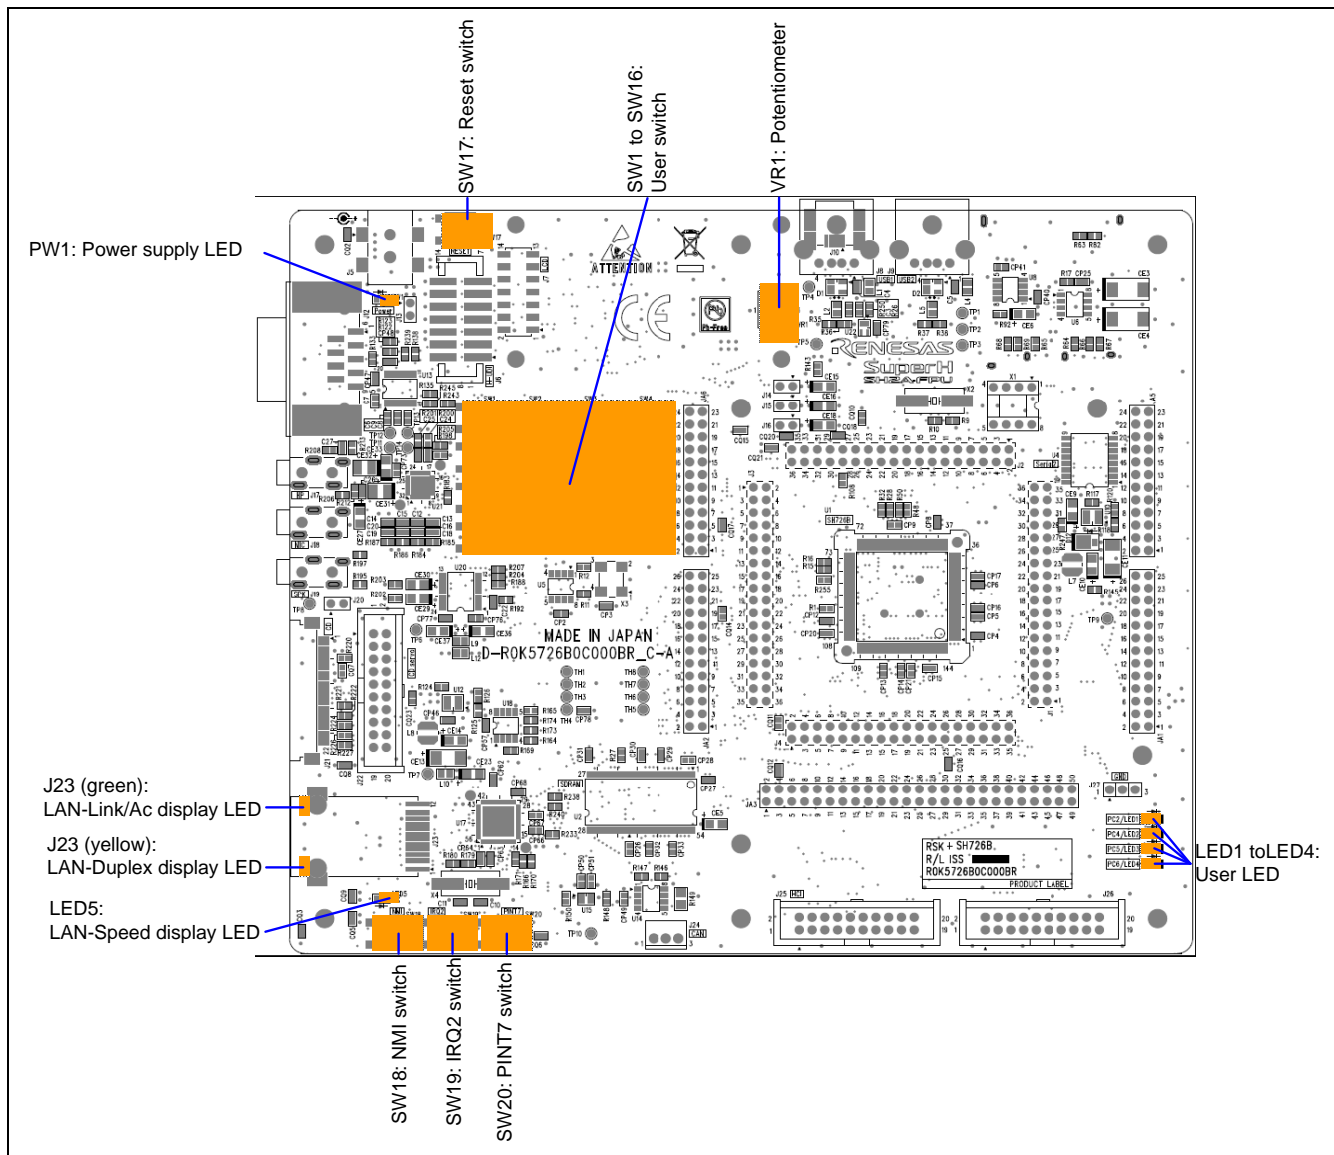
R0K5726B0C000BR Operation Parts Layout
